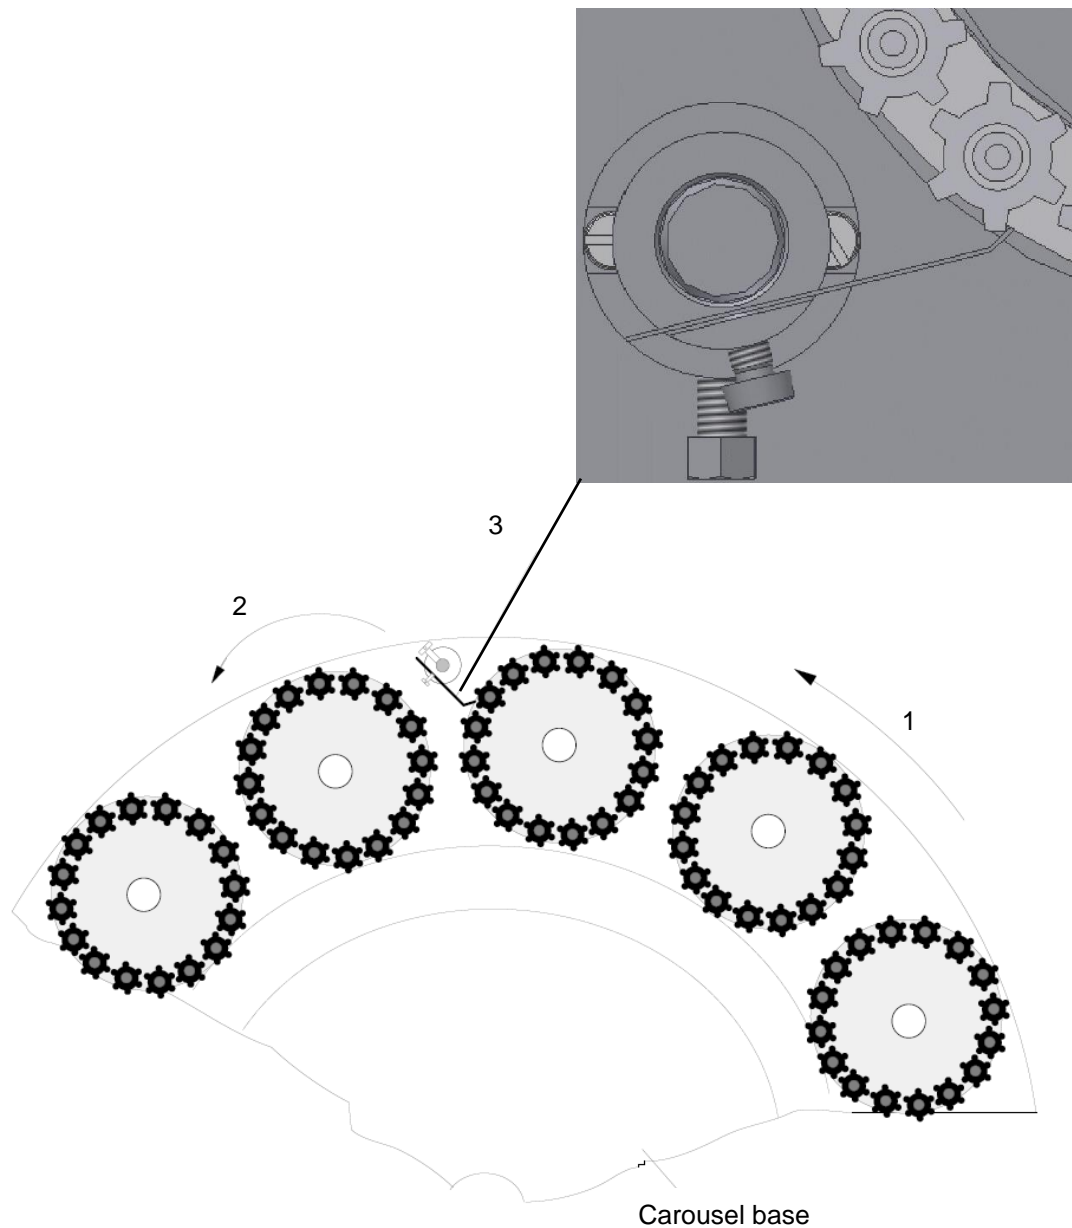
Triple planetary rotations of a of a coating fixture. The 3-fold rotation is actuated through flicker fingers acting on small gear wheels placed underneath sleeves in which each shank tool is mounted on. [Courtesy of Oerlikon Balzers]
